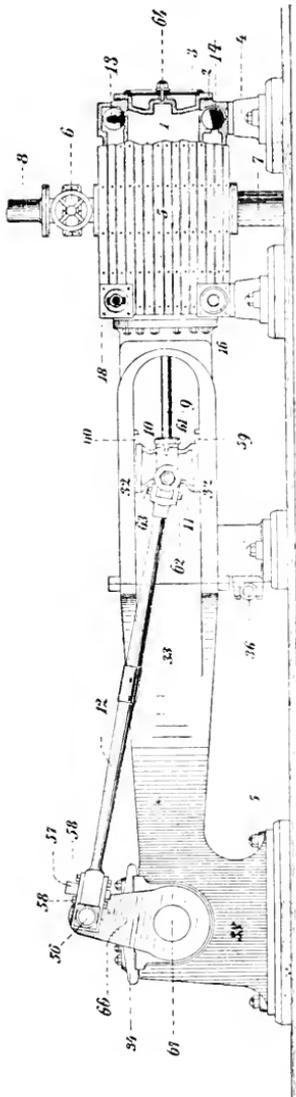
THE CORLISS ENGINE. OUTLINE VIEW WITH PARTS NUMBERED.
